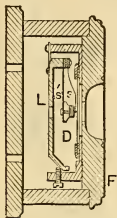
Section of Blake transmitter. D, diaphragm; S, carbon spring; S', platinum spring; L, iron bracket; F, adjusting-screw.
